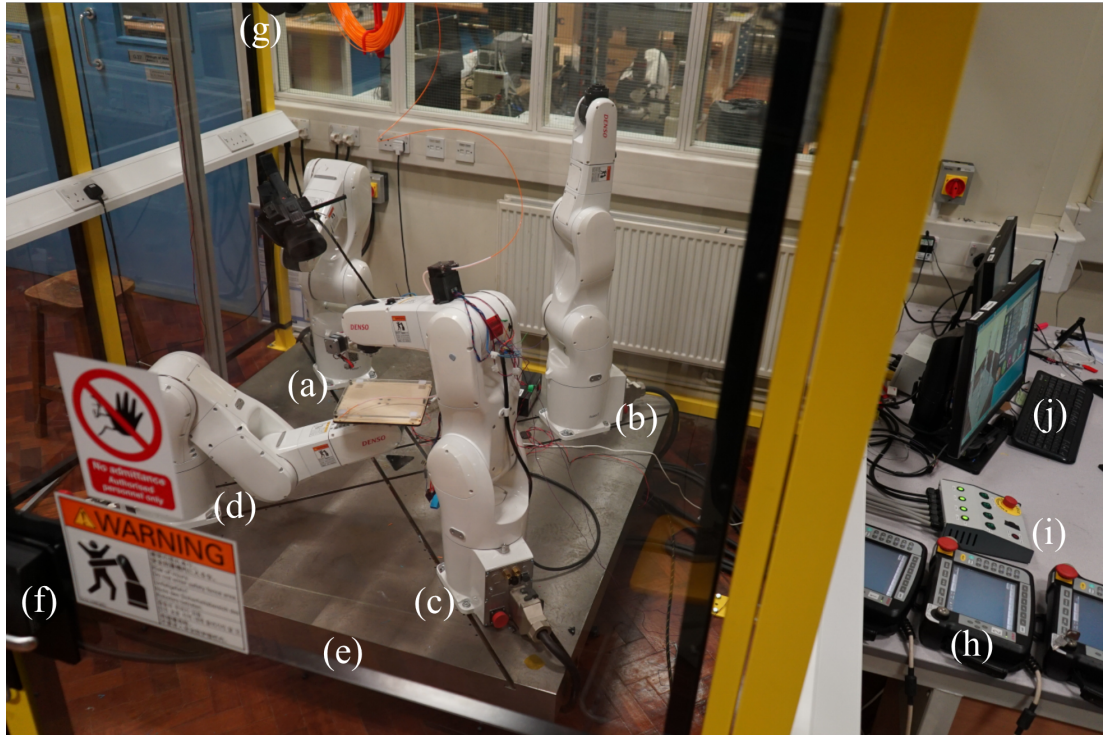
Photograph of the Additive Robot Manufacturing System (ARMS). Briefly this is comprised of: (a) Camera Robot, (b) Pick and Place Robot, (c) Extruder Robot, (d) Build Plate Robot, (e) Steel base plate, (f) Safety enclosure with door interlock, (g) Spools of filament suspended overhead, (h) Robot teach pendants, (i) Control Panel, (j) System Computer.
